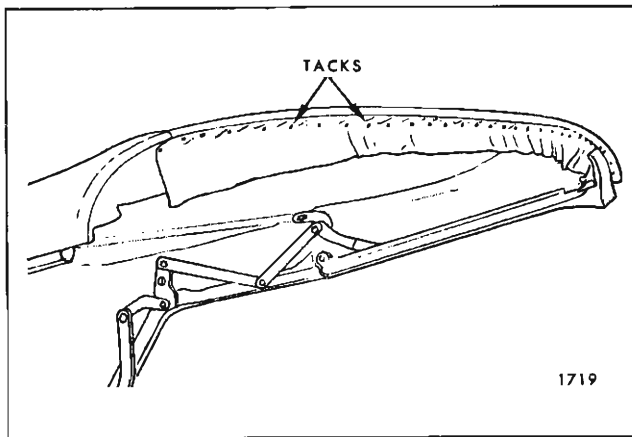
Installation of Top Material to Front Roof Rail
